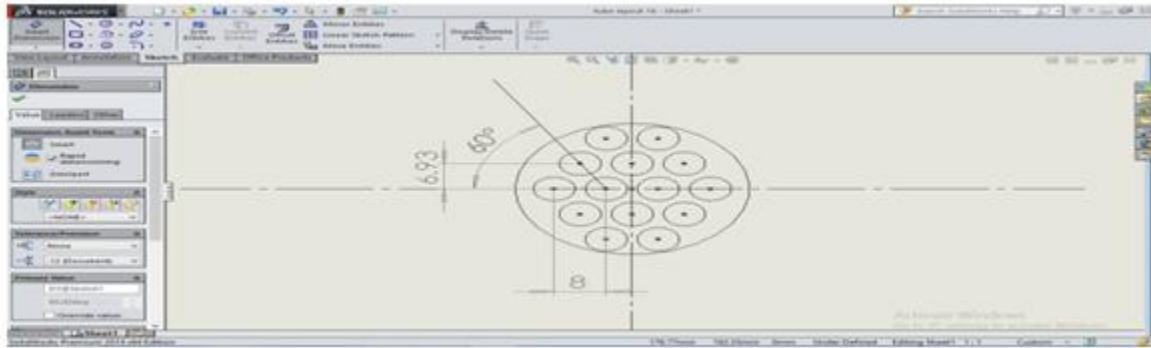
Tube Layout for Shell and Tube Heat Exchanger
